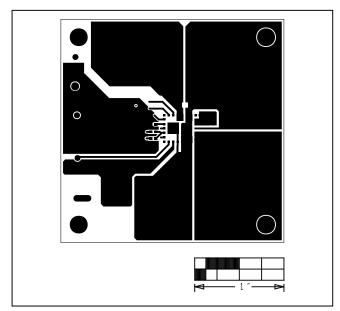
MAXM17545 EV Kit PCB Layout—Component-Side
